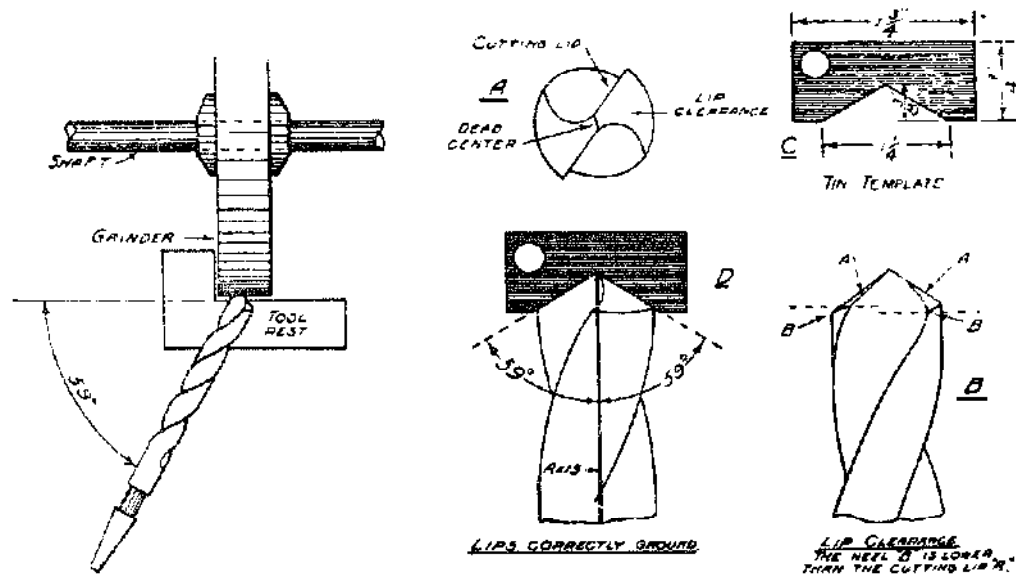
Details for Holding, Grinding, and Testing a Drill.
